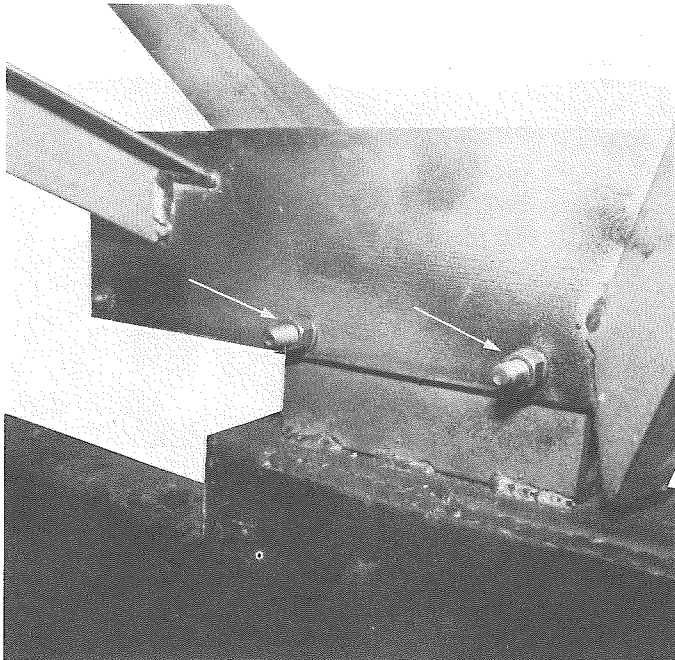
Sub-Frame Mounting Positions: There are three mounting positions located on both right and left frame rails. The first position is located forward near the bumper mount at the upright of the upper structure. Remove two (2) 9/16" diameter nuts from both sides, but do not remove bolts at this time. Be sure when you begin this final phase of removing the mounting bolts that you have a way of bracing the sub-frame.
